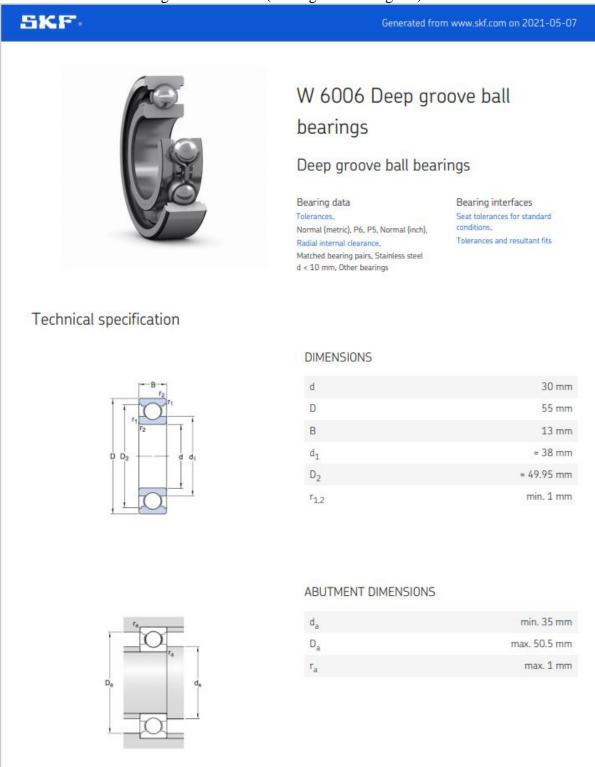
Bearings W 6006 specifications (1) [7]
